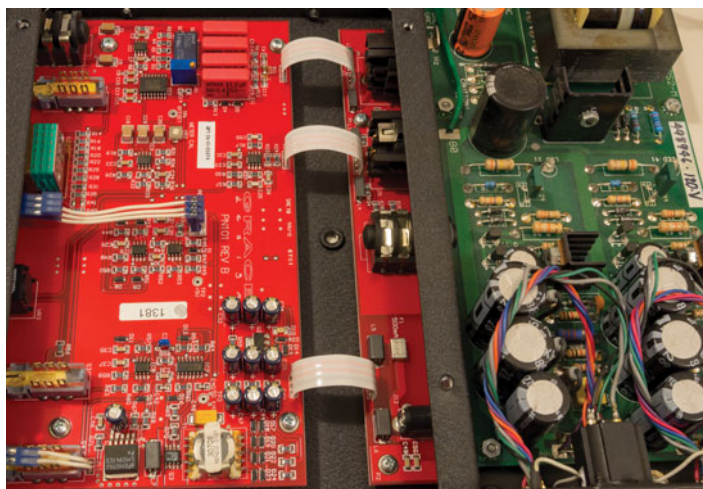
Comparing surface-mount (left) and through-hole (right) assembly.
